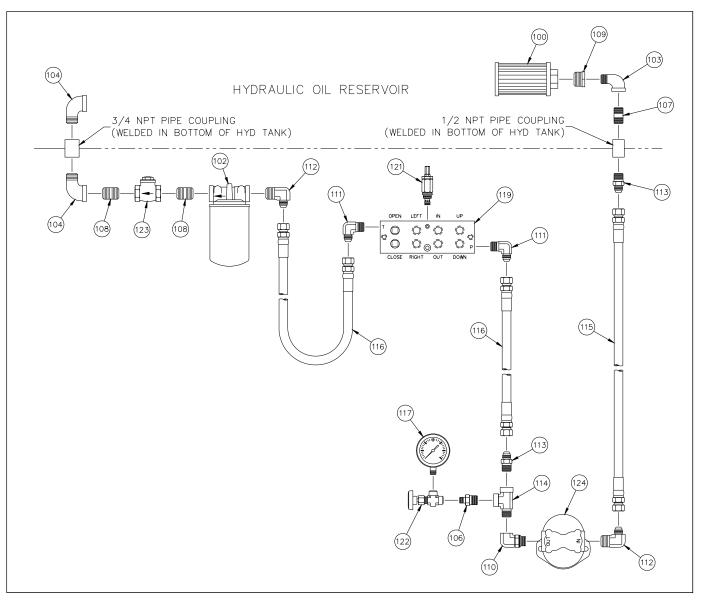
, HYDRAULIC POWER UNIT FITTINGS& HOSES
